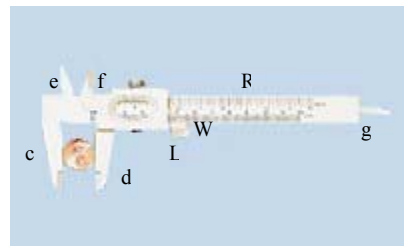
Measuring a variety of dimensions with the vernier caliper.
